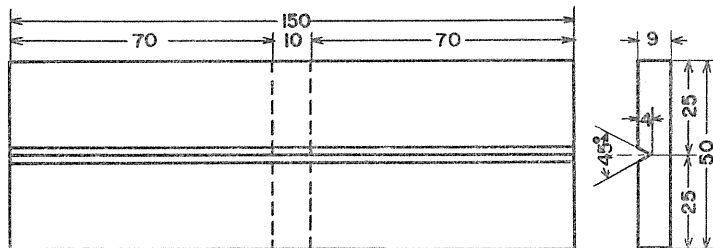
Bead-on-plate test pieces with groove, unit mm.
